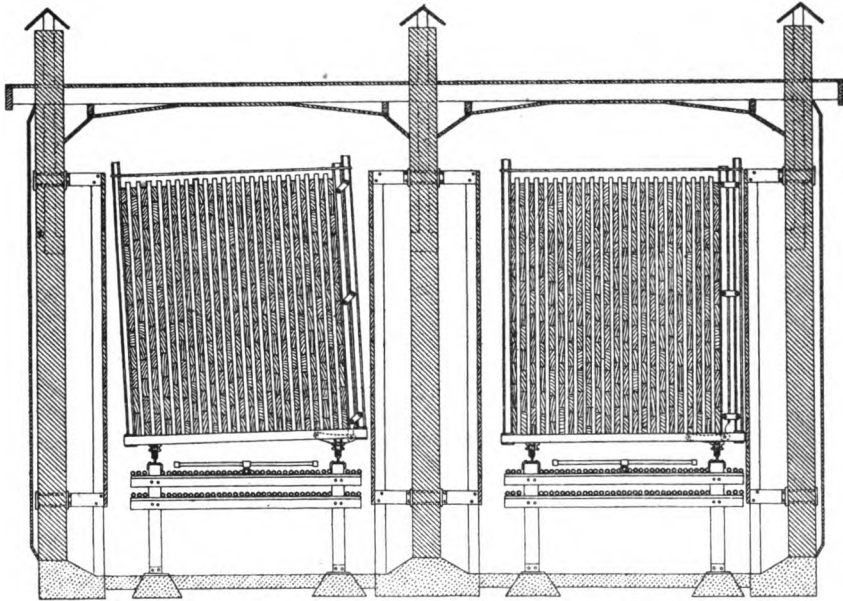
Sectional view of two-chamber dry kiln with vertical stacked kiln cars, showing how take-up stakes absorb slack due to shrinkage and keep load tight and boards flat.
